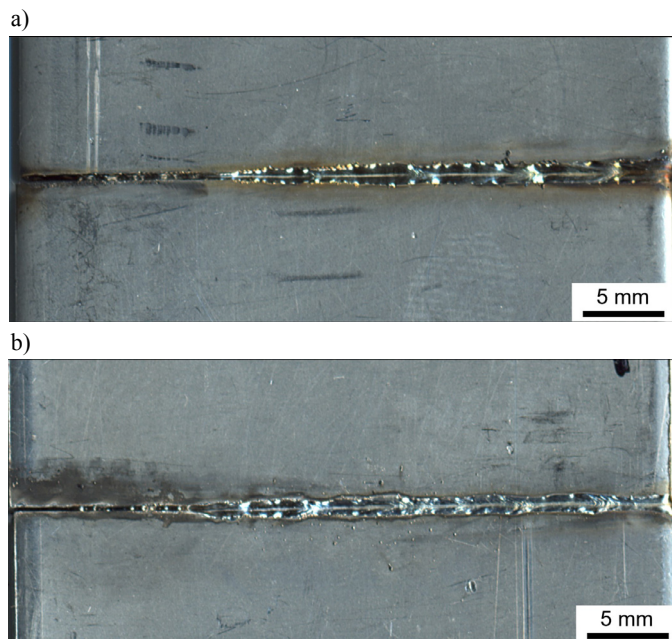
A view of the butt joint of 2.0 mm sheet of AISI 304 stainless steel laser welded by the disk laser at output power 1.0 kW, welding speed 3.0 m/min, and focal spot position -1.0 mm (Table 3); a) weld face, b) root surface
